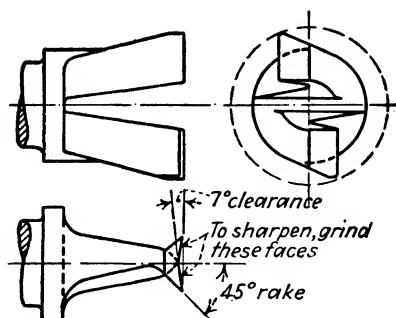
A counterbore or stub-boring tool can be made from a scrap twist-drill stub.
